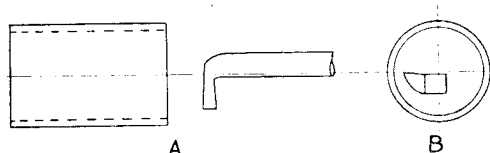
"A"—parting from the inside; "B"—checking for clearance
